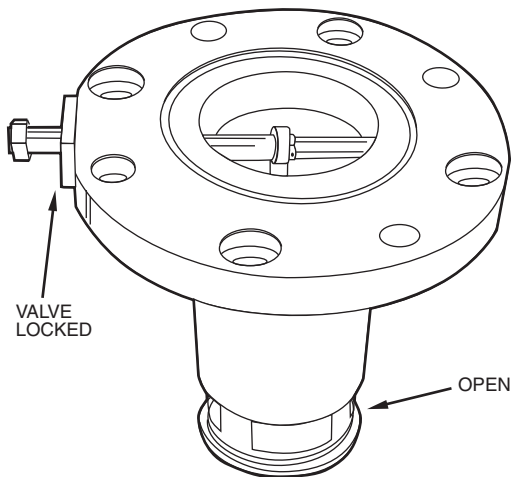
B — Suction Service Valve Locking Device, Open and Locked (Flooded Cooler Units)
